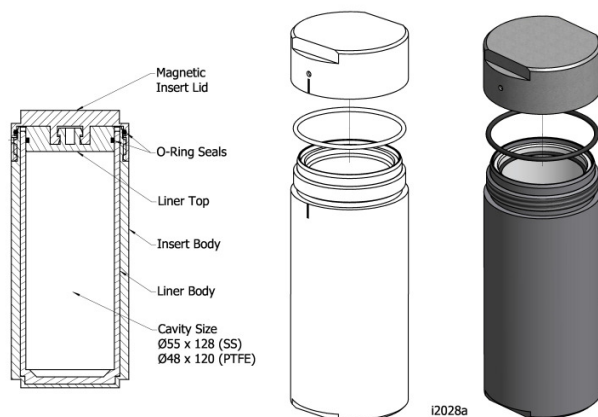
Shielding insert HS-55x128-SS Insert Design # 3987
